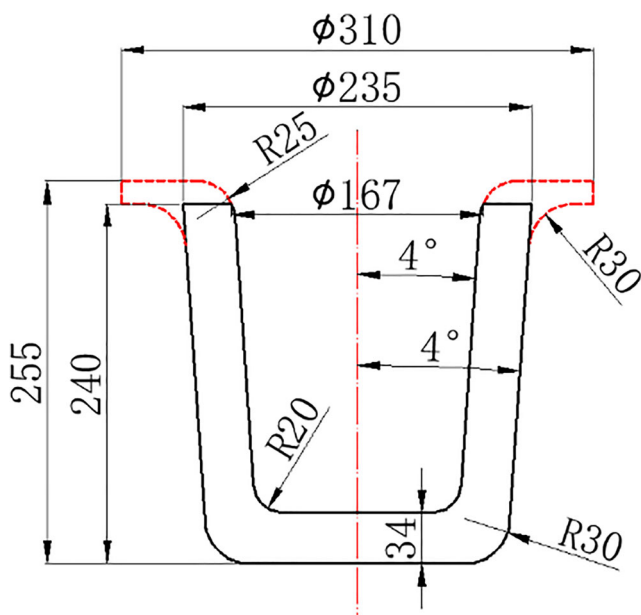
The sketch map of flat bottom cylindrical parts and flanged cylindrical parts
